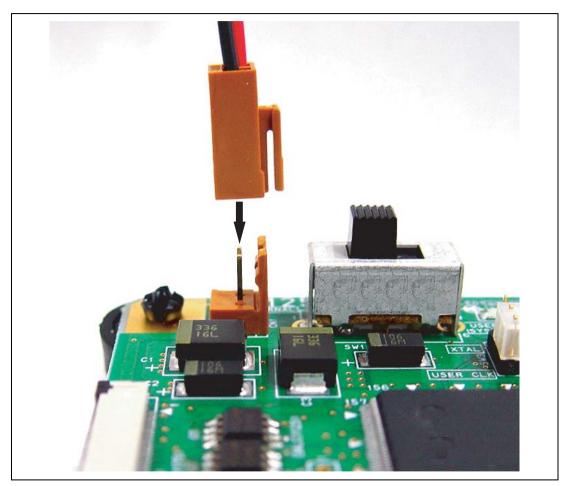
Connecting the Power Cable to the Debugging MCU Board
